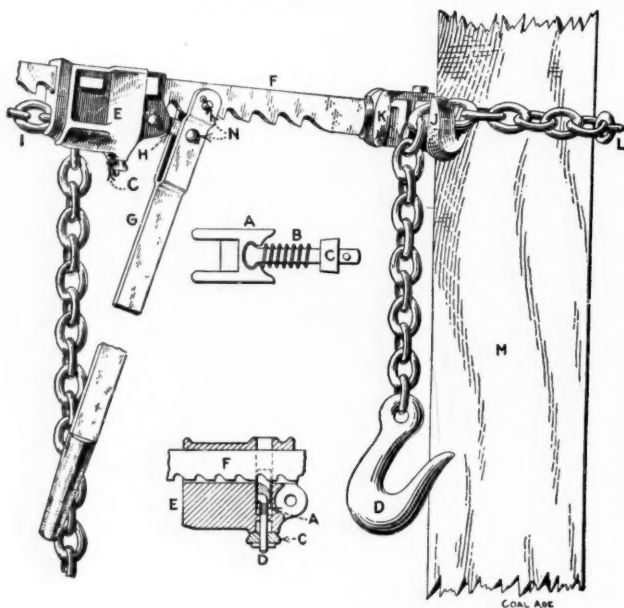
SHOWING DETAIL OF THE SYLVESTER MACHINE FOR DRAWING POST TIMBERS
